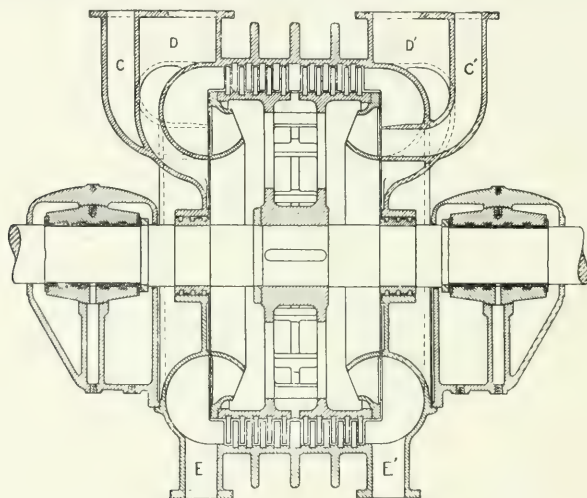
SECTION THROUGH ASSEMBLED DYNAMOMETER
